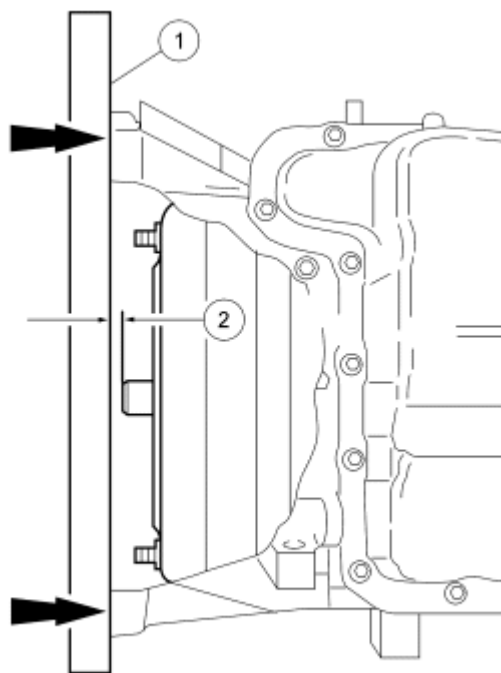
Installing/Removing Torque Converter Using Special Tools
